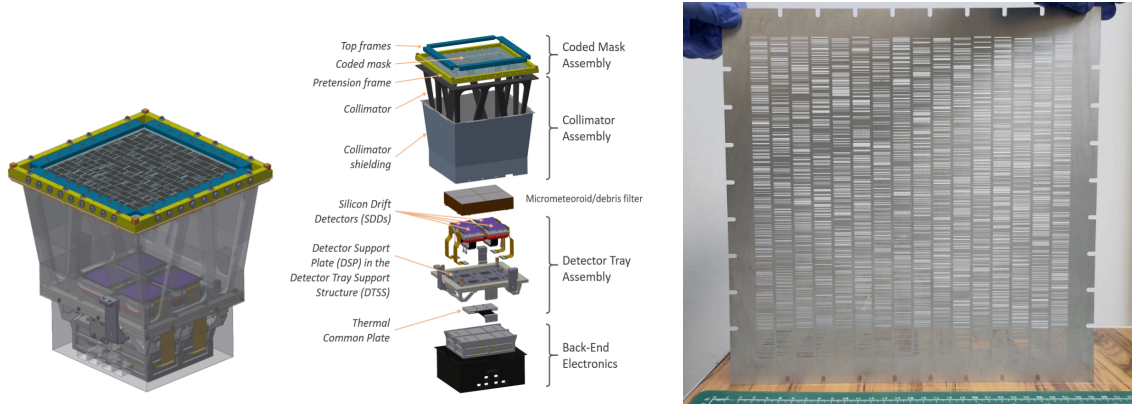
The WFM Camera, exploded view of the WFM camera and Coded Mask Design. Left: The WFM camera features a detector plane comprising four detector assemblies (shown in blue), with the coded mask mounted on top. The design supports both fine and coarse resolution directions. The collimator structure and the back-end electronics box located beneath the detector plane are also shown. Right: The Full size coded mask with final pattern is made of tungsten (W) with a slit pitch of $0.25 \text{ mm} \times 16.4 \text{ mm}$. The coding area measures $260 \text{ mm} \times 260 \text{ mm}$ with a thickness of 0.15 mm . It contains 16 rows of evenly distributed slits, spaced 2.4 mm apart. Grooves along the edges are included for assembly. (Source: [Hernanz et al. \(2024\)](#))
